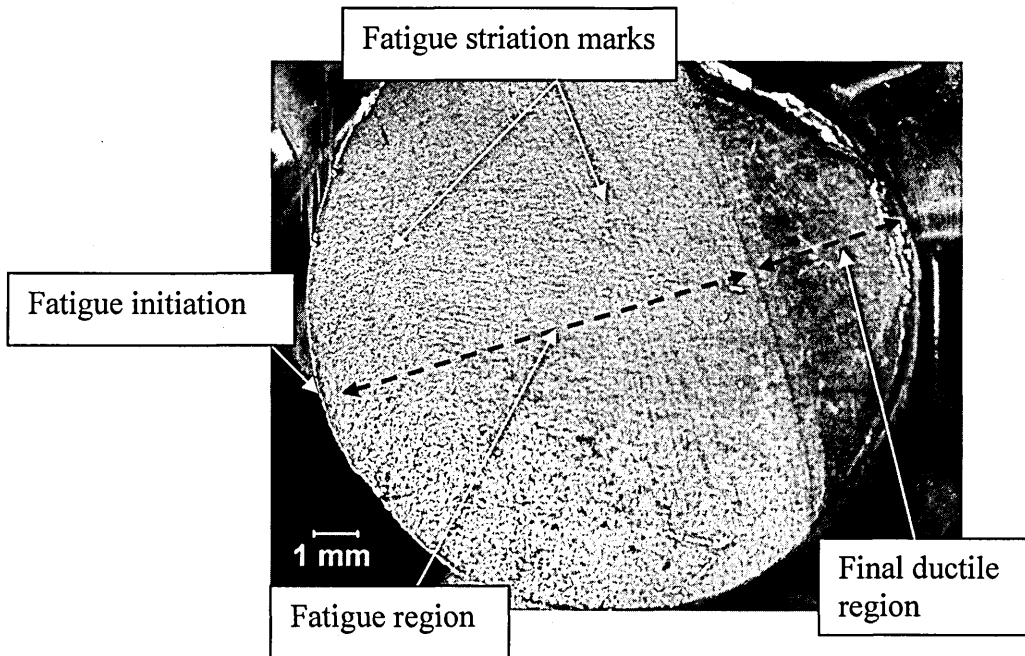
Typical fracture surface of a failed stem [163].
